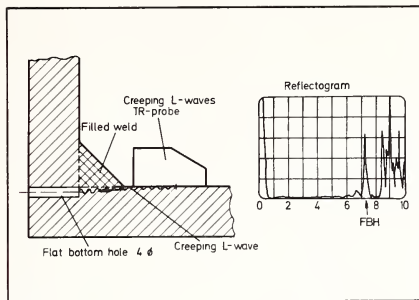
Creeping waves for the inspection of a filled weld.
